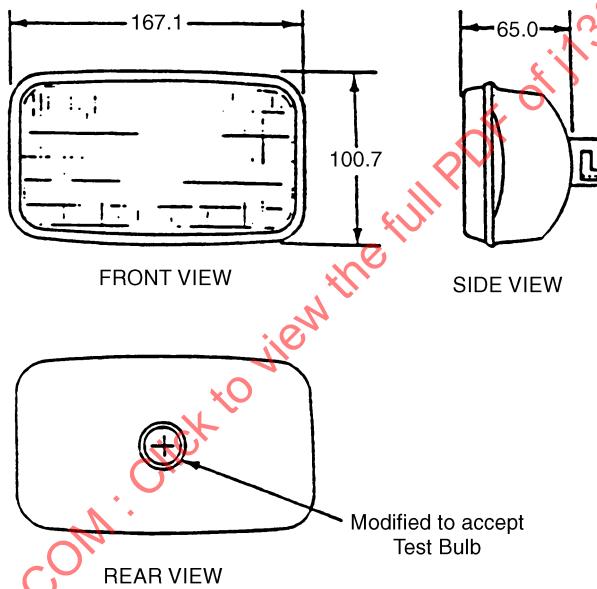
TEST ENCLOSURE DIMENSIONS
